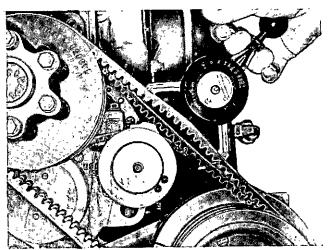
(N11977) Checking belt tension with ST-1138
